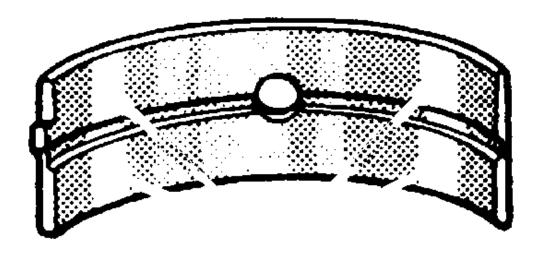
Crankshaft Bearing Polished Sections (Improper Seating) Courtesy of GENERAL MOTORS CORP.
